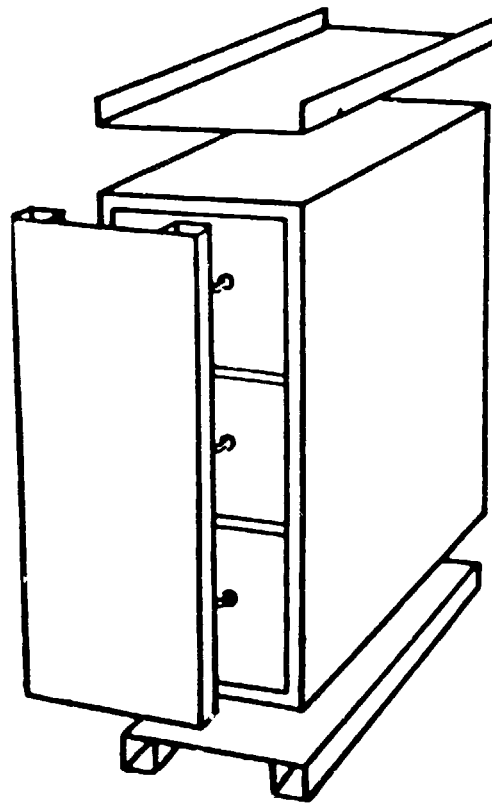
Packaging of a filing cabinet, providing clearance at top, bottom and front (to protect the drawer handles).
